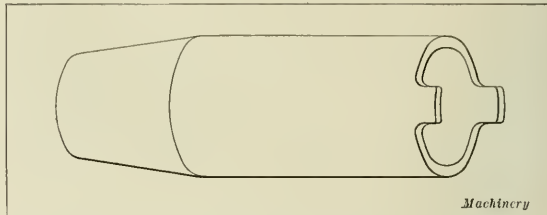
Tool for removing Bearing mounted on End of Shaft
